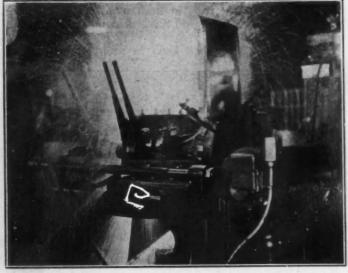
Shroud Butt-Welding Machine in Operation Contact, Lasting 8 Sec., Is Made and Broken Automatically. Alternating Current Is Transformed in Two Steps from 2500 Volts to between 7 and 9 Volts at Point of Contact. Two Machines Each Produce 40 Welds per Hour
